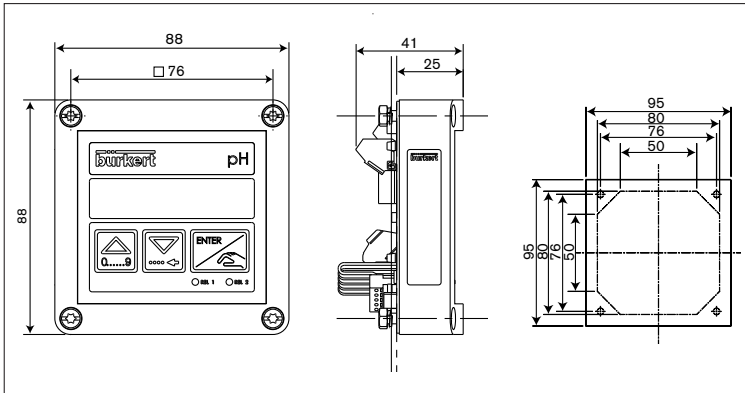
Dimensions pH transmitter 8205 panel-mounted version and drilling jig
